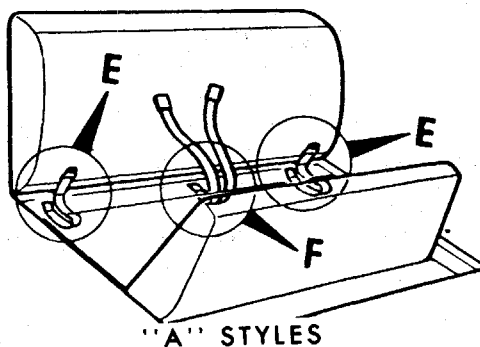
Shoulder Belt Retractor Cover Removal - "A,F,H and X" Styles
